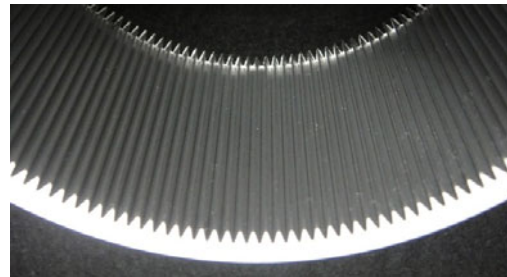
Grooved surface manufactured by the extrusion method of the aluminium beam pipe.
